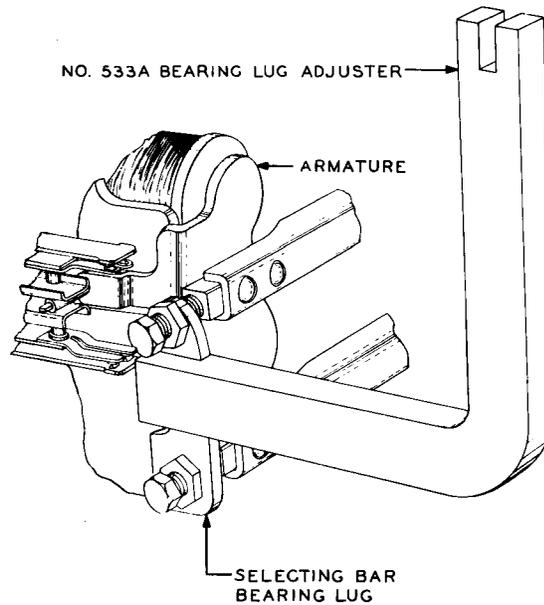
Fig. W – Method of Adjusting Selecting Bar Bearing Lug for Armature Travel
